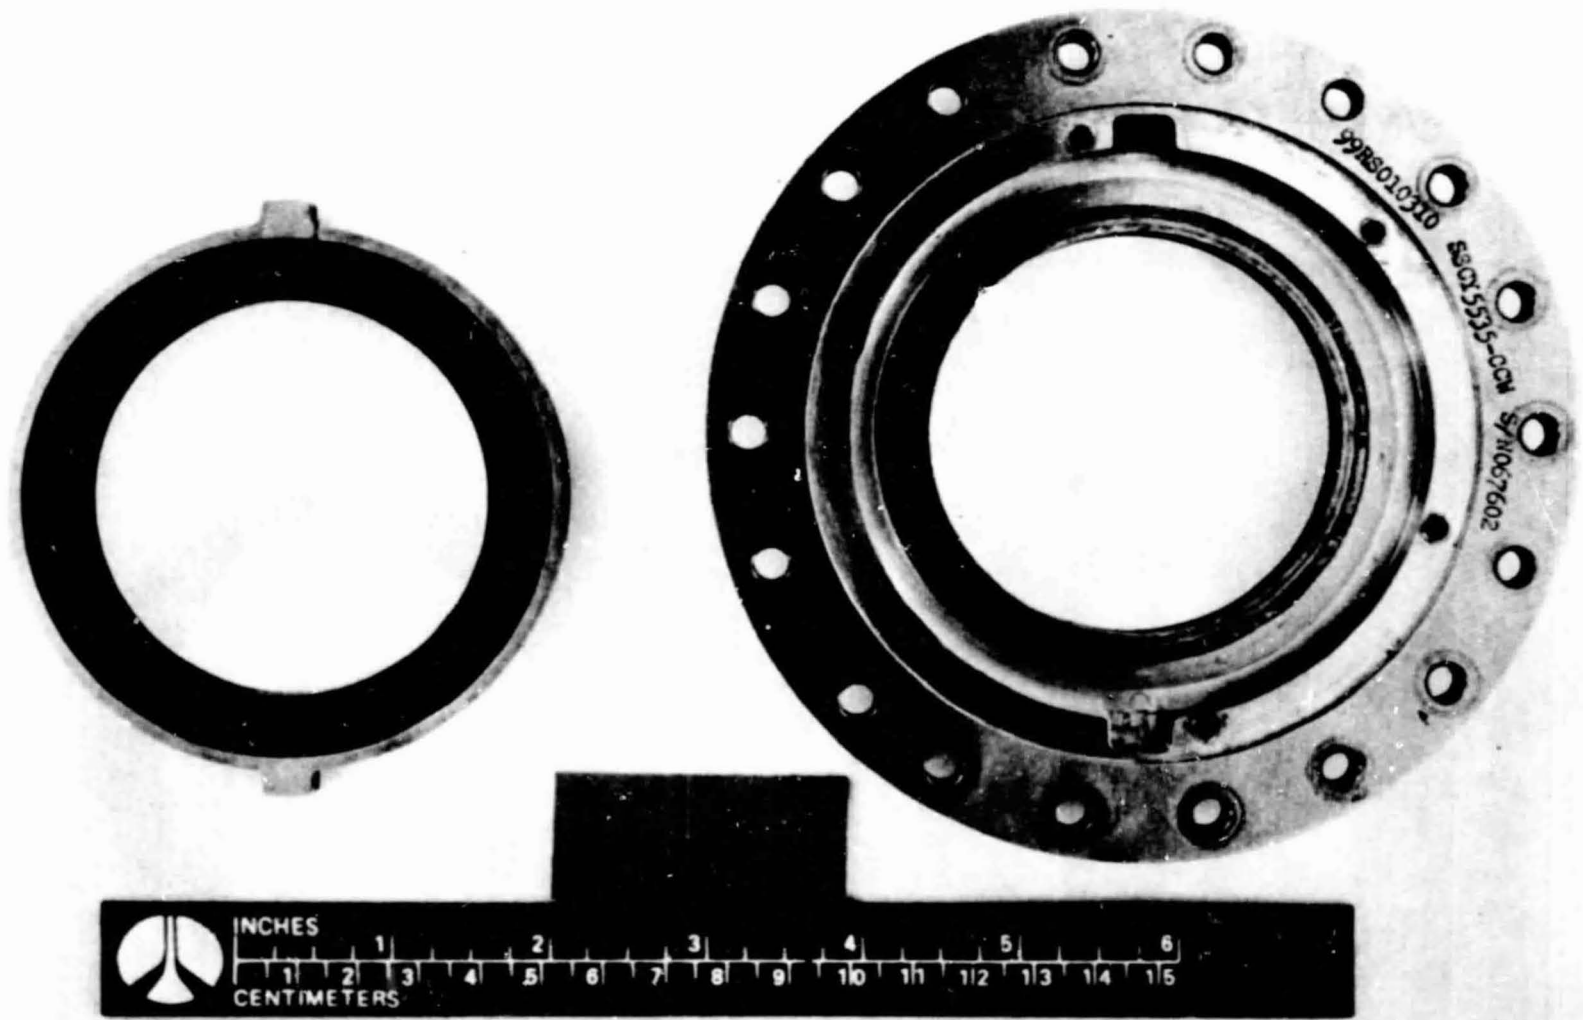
Pump End Primary Seal, P/N 7R0011525, S/N 047905, Build 20, Posttest 477
